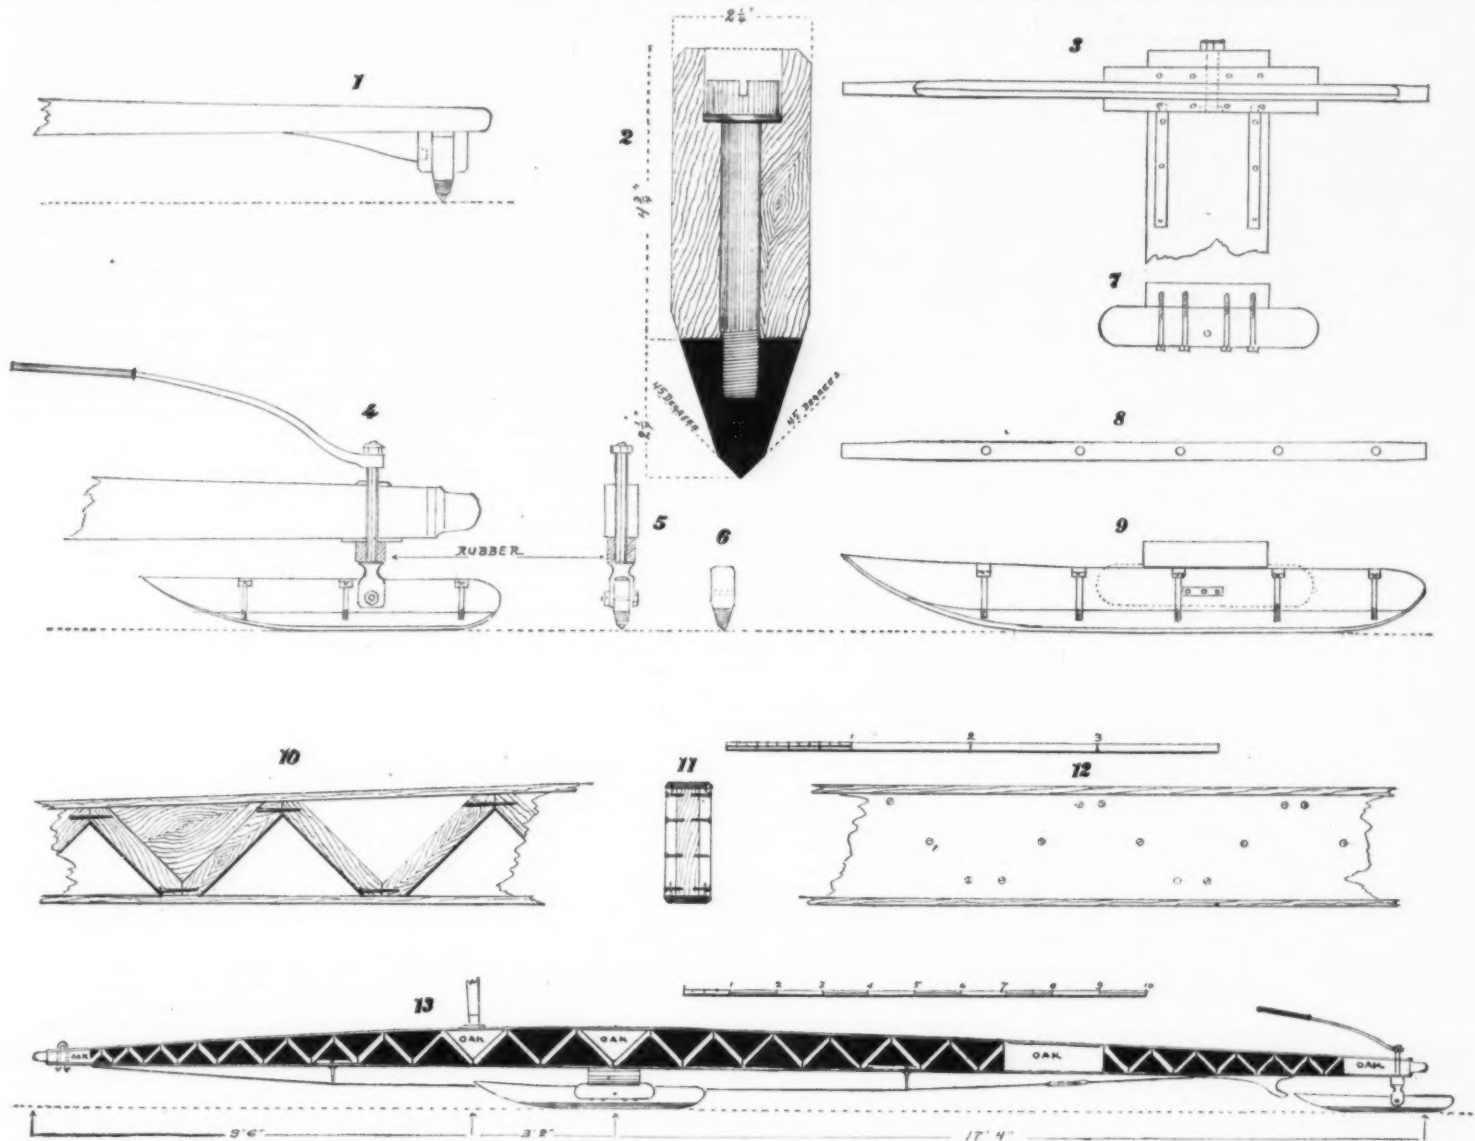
PLATE II.—DETAILS OF ICE YACHT CONSTRUCTION.
